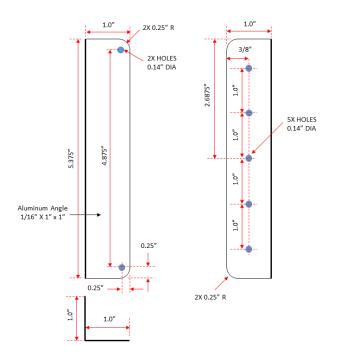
Drawings of Angle Bar for Holding Solar Panel.
